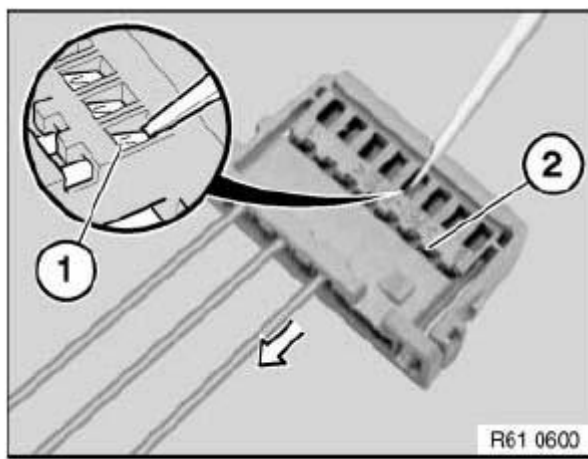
Pushing Contact Carrier Out Of Housing
